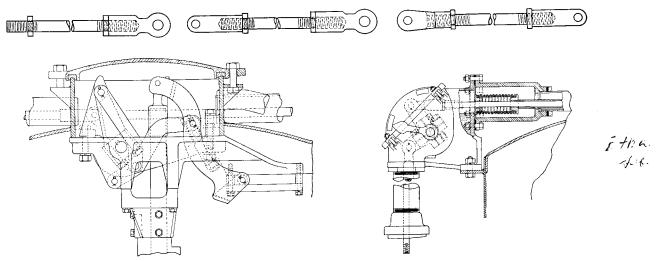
Main Assembly Details, Type G-22, 400-600 Amperes, 110,000 Volt Outdoor Breakers
